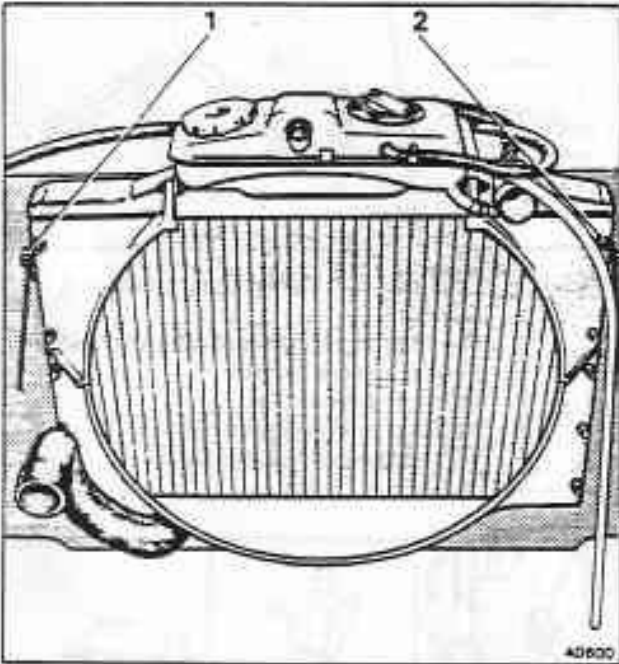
Mounting points for radiator and fan cowl Corniche
